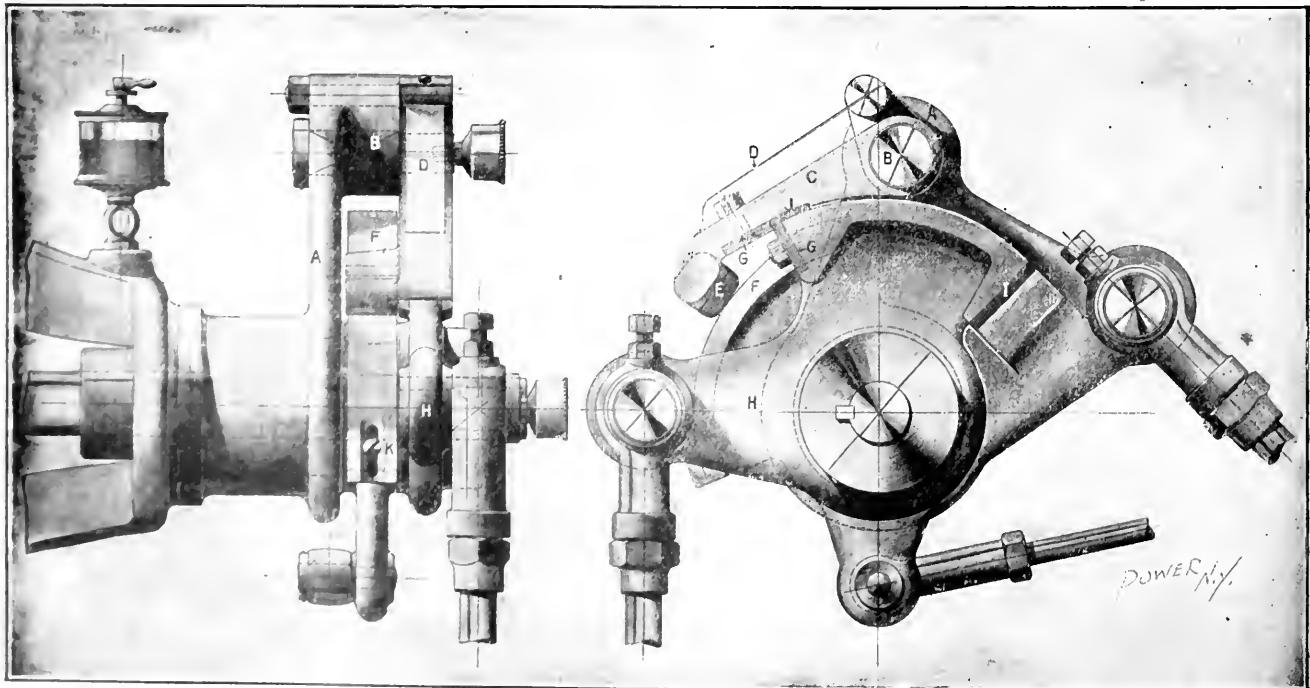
DETAILS OF THE FRANKLIN VALVE GEAR
